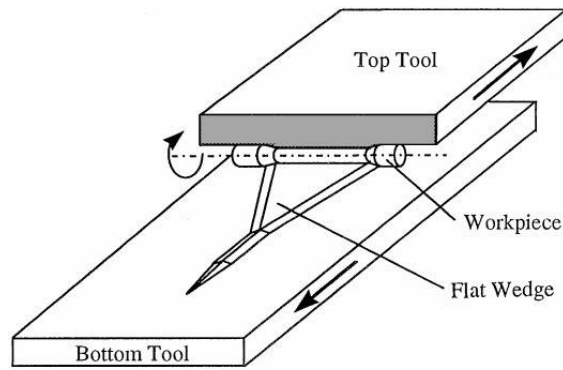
Flat Wedge Type Cross Wedge Rolling [23].
